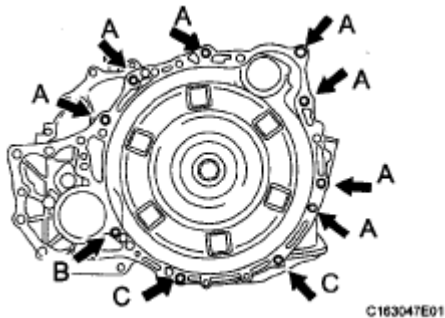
Locating Automatic Transaxle Assembly Bolts
